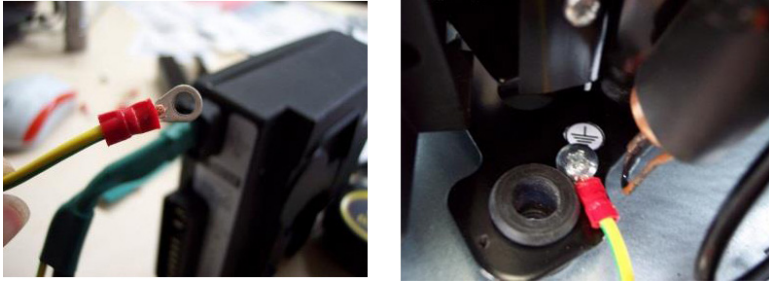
Detail of earthing cable connection on the metal part of the compressor
